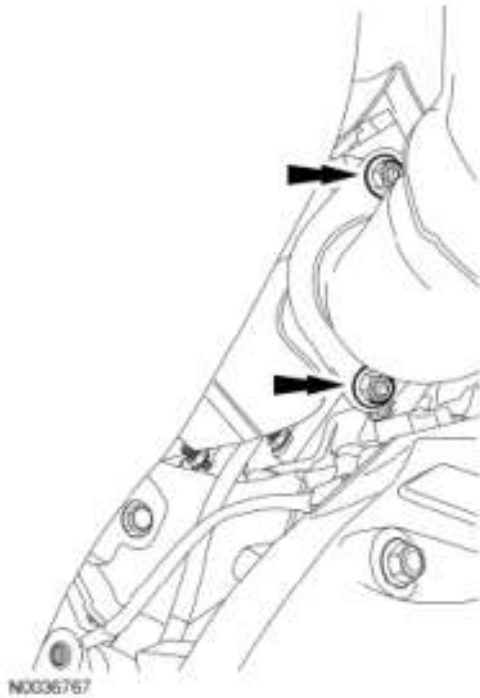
Locating Dual Converter Y-Pipe Bolts
